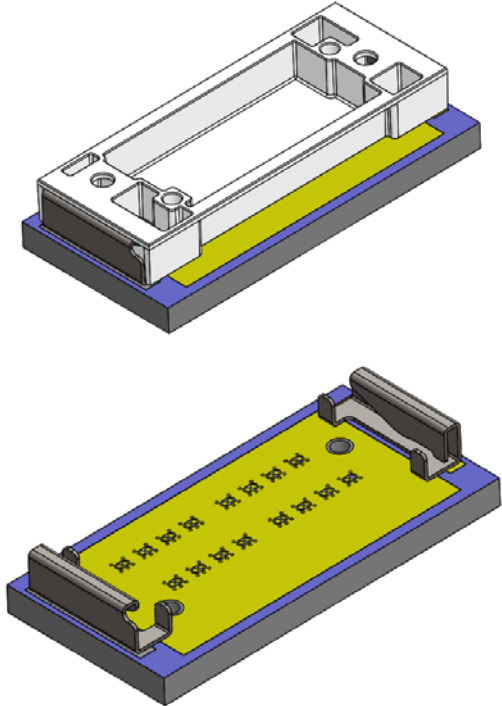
ANCHOR-CARRIER ASSEMBLY ON PCB, ANCHORS ON PCB
